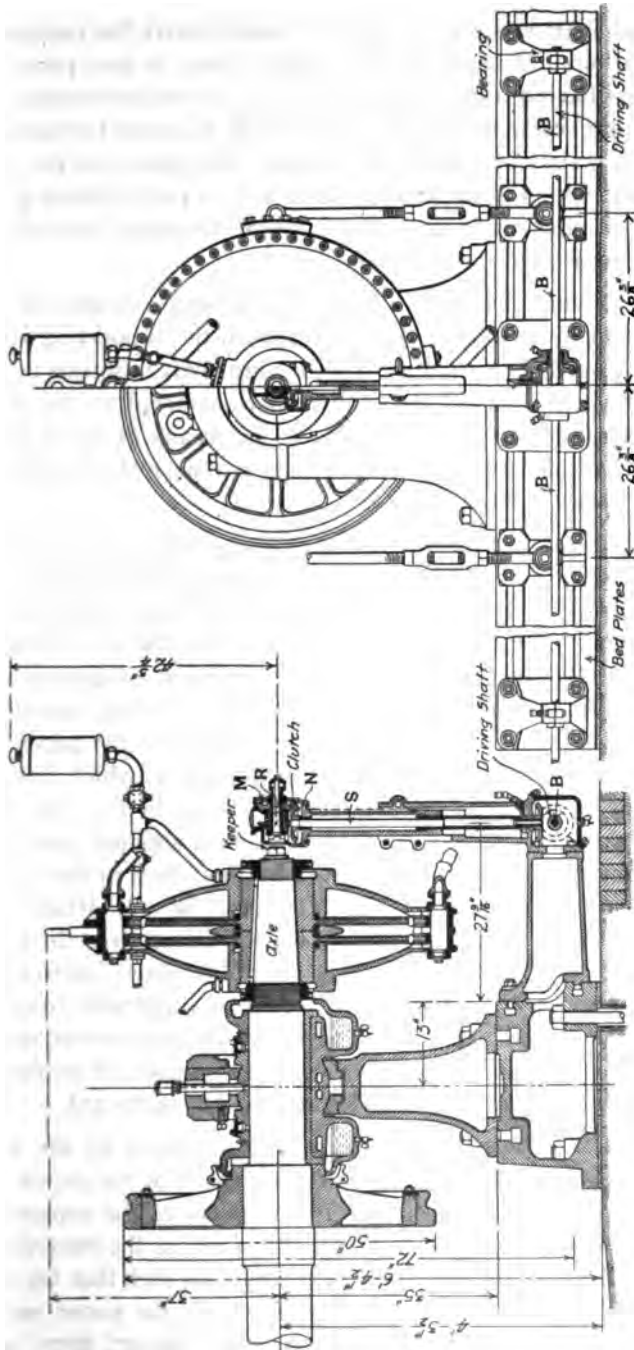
Section Showing Gear Box and Shaft for Paper Driving Mechanism.
